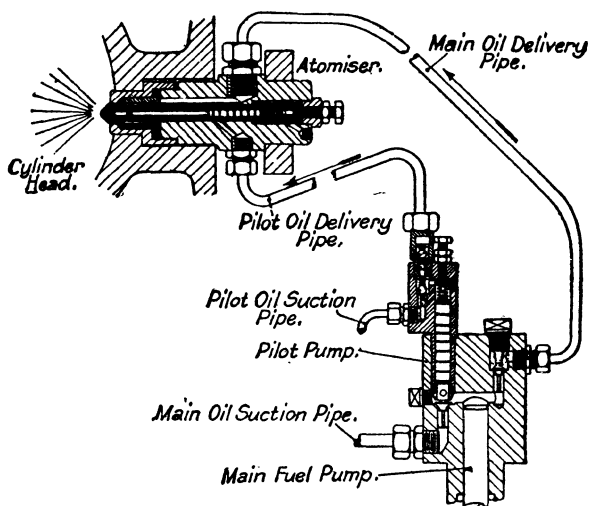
Pilot Oil Pump and Sprayer for Tar Oils
